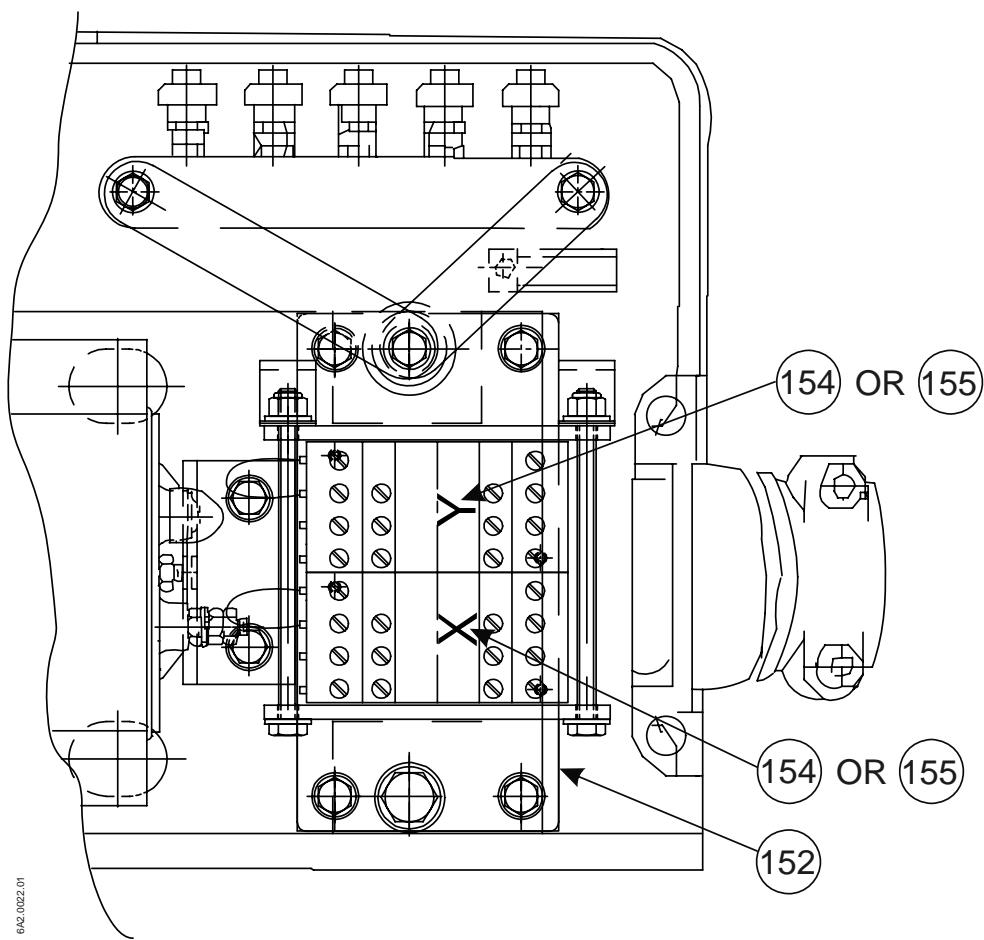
Contactor Assembly (N410011-01) "X" and "Y" Label Location
